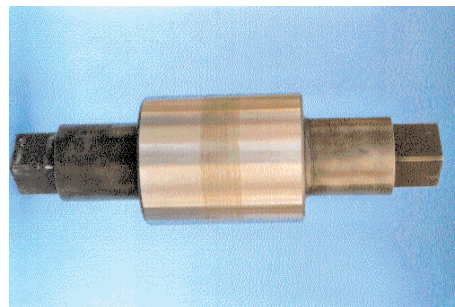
Cold rolling tool for wire production, wear and tear area severally coated (5 mm thickness) with WC/Co-NiCrBSi by multi layer stacking
